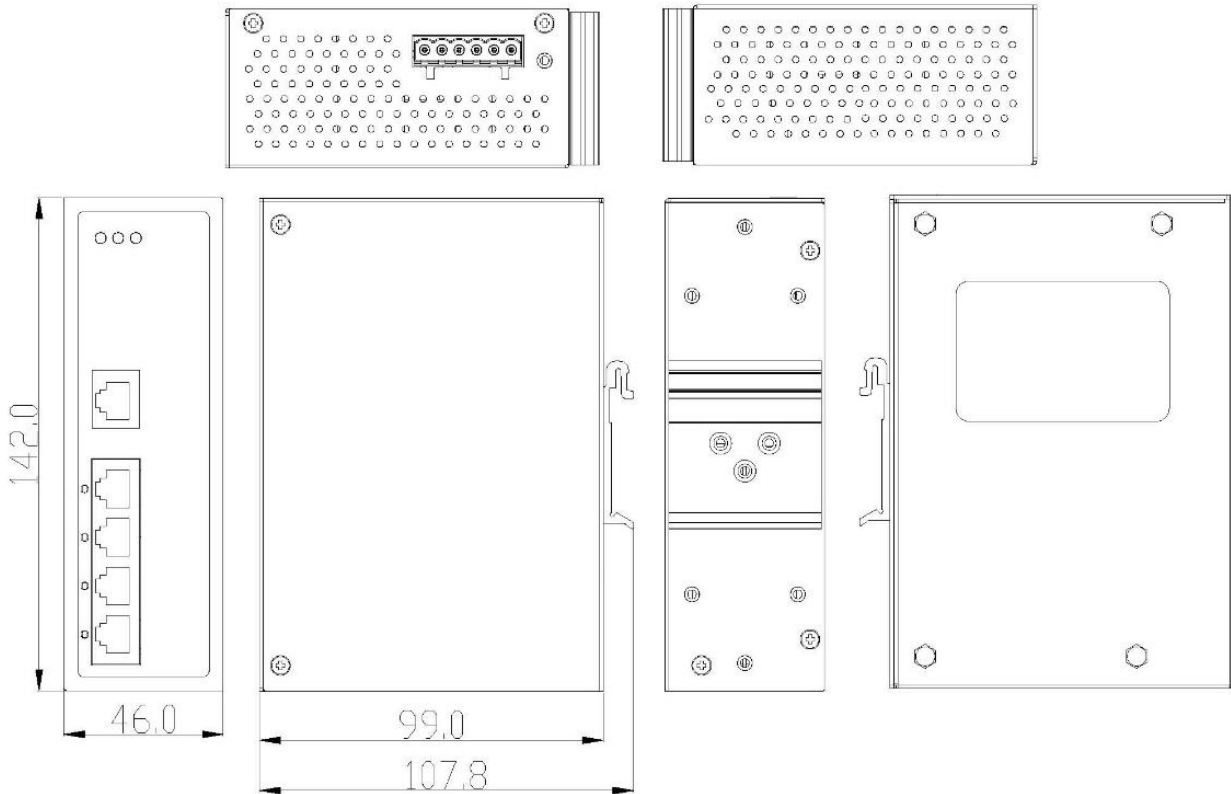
PT2-0500-24 Series Physical Dimensions
